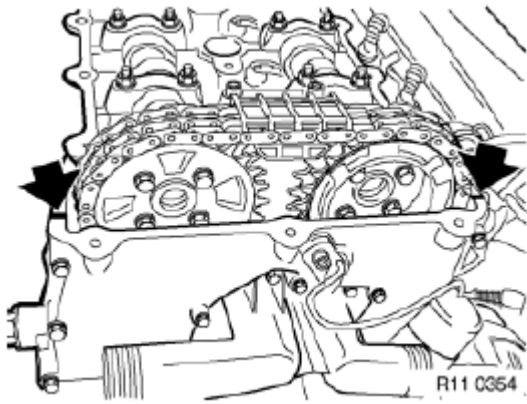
Locating Gasket Sealing Surfaces (1 Of 2)
